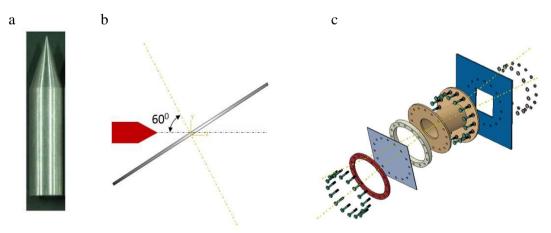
(a) Projectile used; (b) Target definition and (c) Target holding fixture employed in the study
